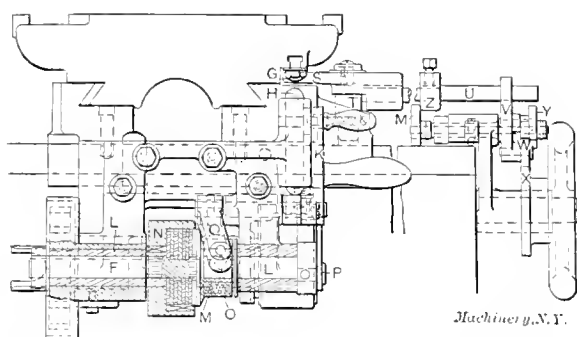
Section through Reversing Mechanism attached to Feed-box of Milling Machine.
